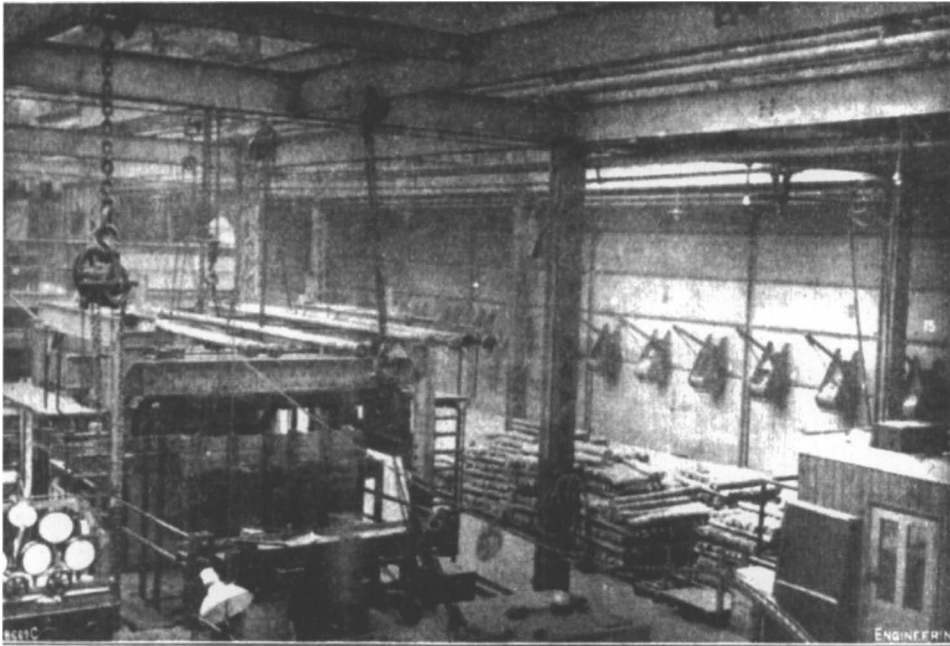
View of Bessemer Laboratory (*Engineering*, 1951).
